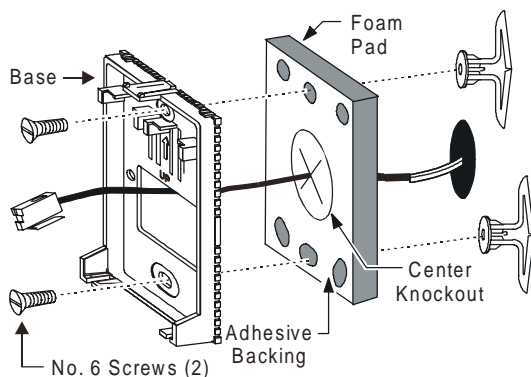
Surface Mounting for TM-9100, TE-7000, and AP-TMx1600 Sensors
